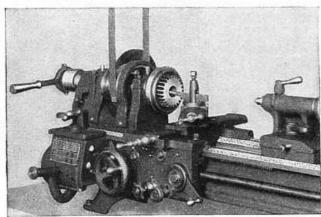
Boring a Pinion Held in Step Chuck Fitted to the 9-inch Quick Change Gear Lathe
